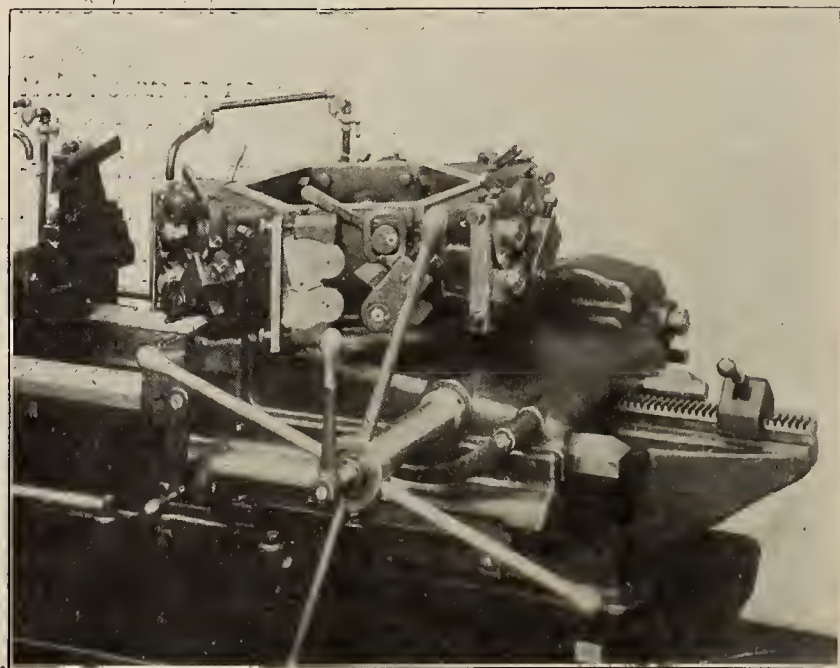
No. 3, HOLLOW HEXAGON TURRET LATHE.
